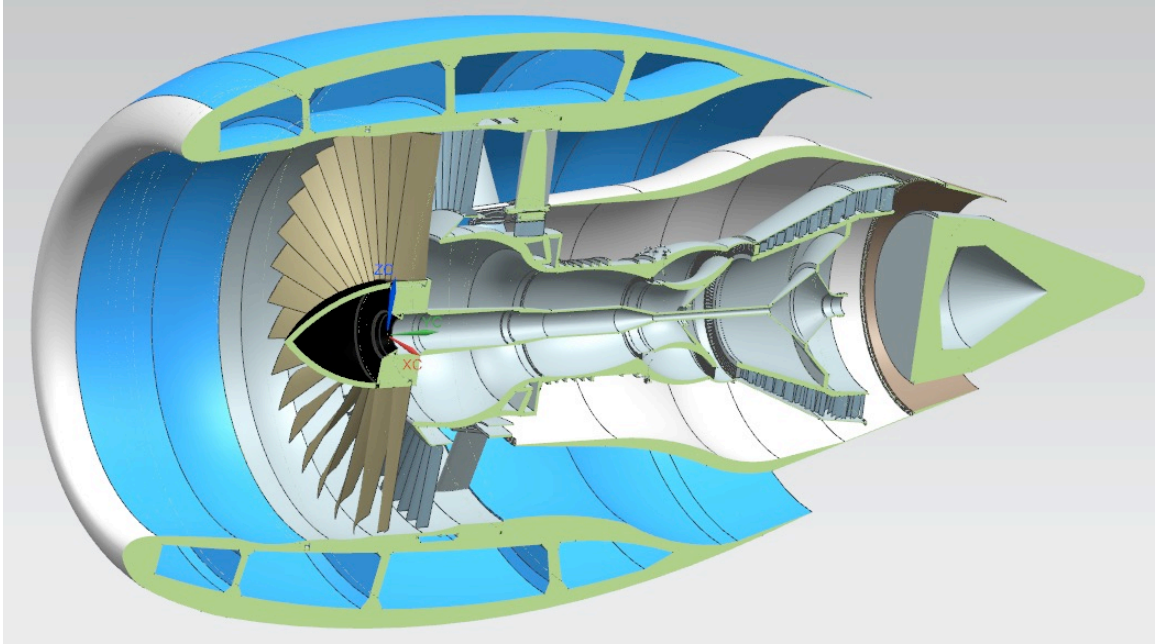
The model of the assembly for the Turbofan Engine [214] and its cross-sectional view showing the components that are CAD part of the assembly.
